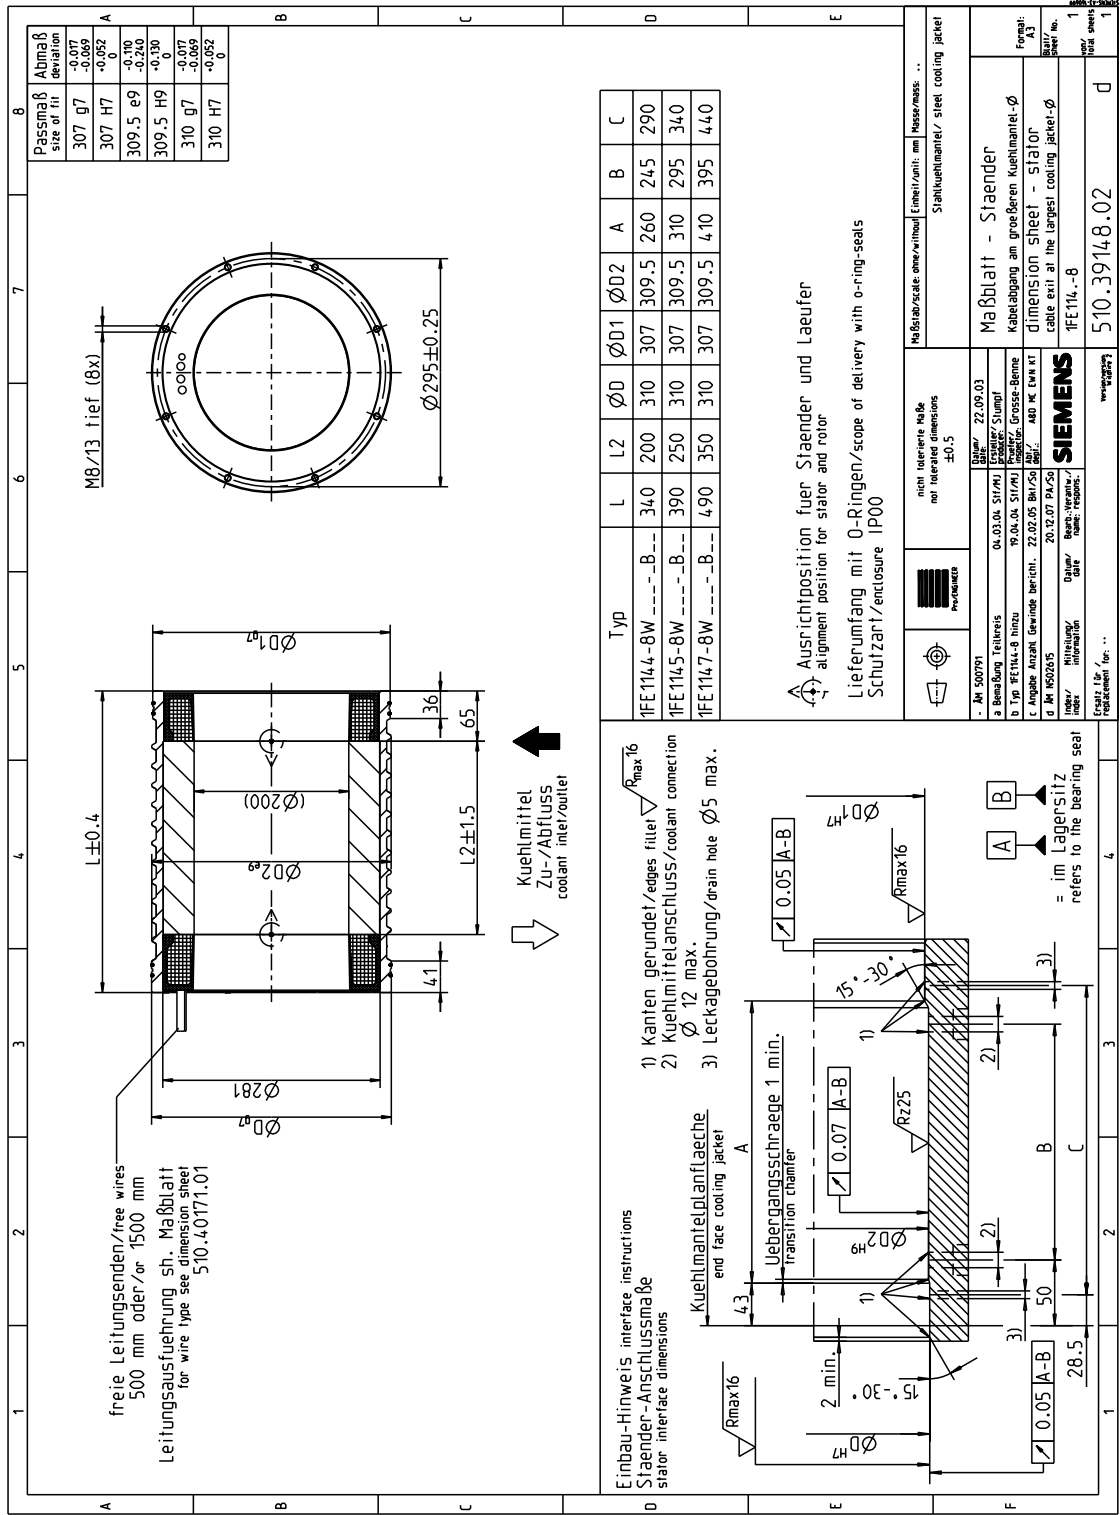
1FE114□-8, stator with cooling jacket, cable outlet at the larger cooling jacket diameter
